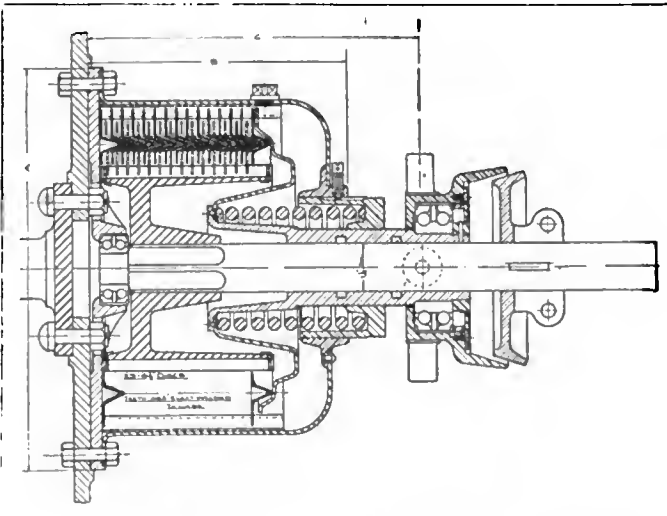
Multiple disc clutch of the Hele-Shaw type, readily accessible
